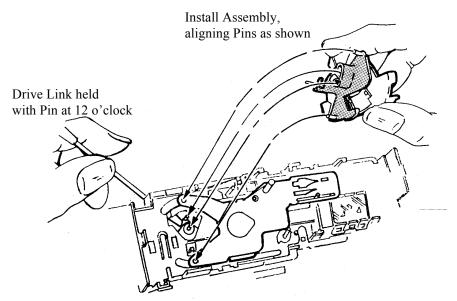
Reassembling Walking Beam to Drive Link & Shutter Blades
